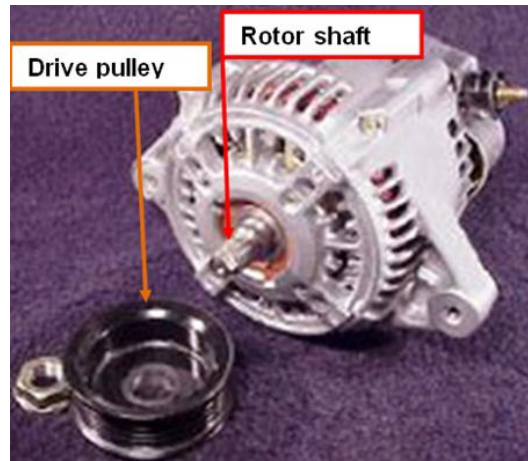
Drive Pulley and Rotor Shaft [3]
